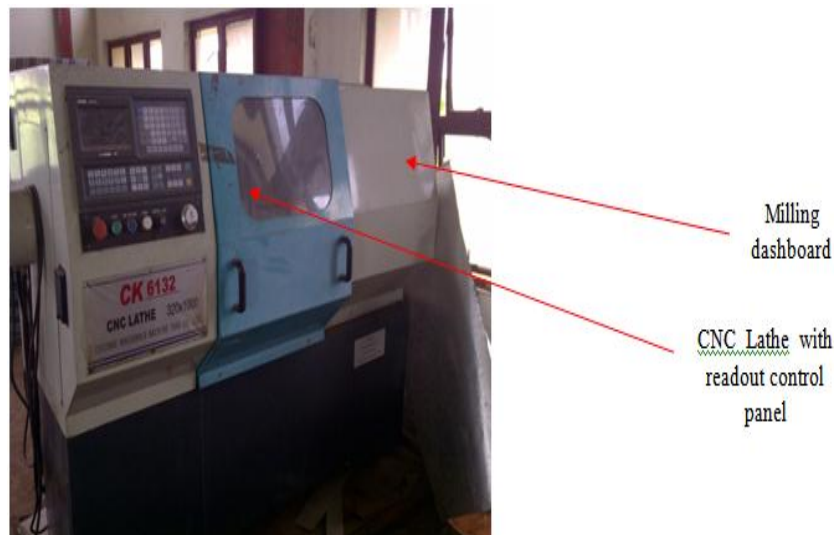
CNC Lathe with readout control panel and Milling dashboard (Source: NASENI Abuja, 2013)
